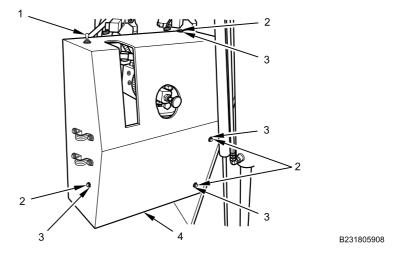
Rear Door/Ramp Hydraulic Pump Cover Installation.
